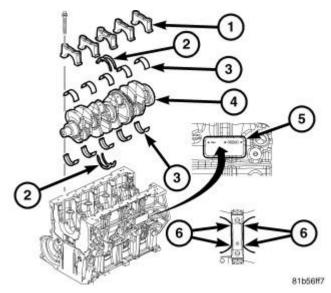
CRANKSHAFT BEARING SIZE MARK Courtesy of CHRYSLER LLC
